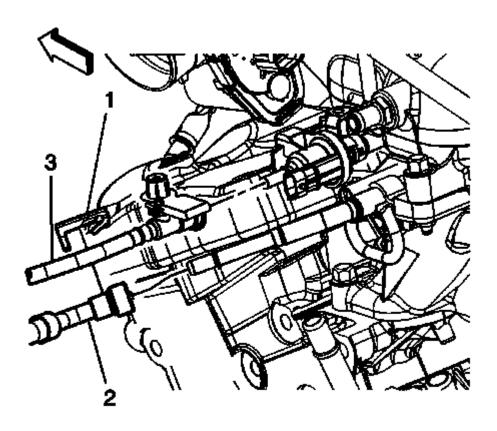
View Of EVAP Pipe Courtesy of GENERAL MOTORS COMPANY
